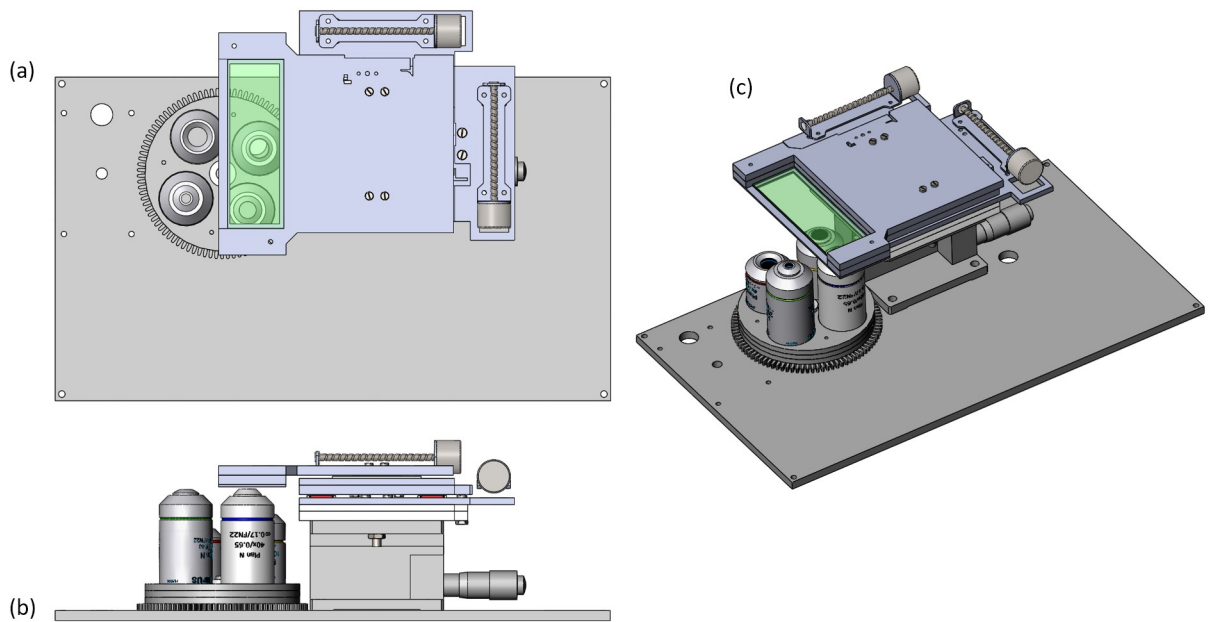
CAD design of stage with sample holder on the side. (a) Shows the top plane (b) shows the front plane and (c) shows the isometric view of the design
